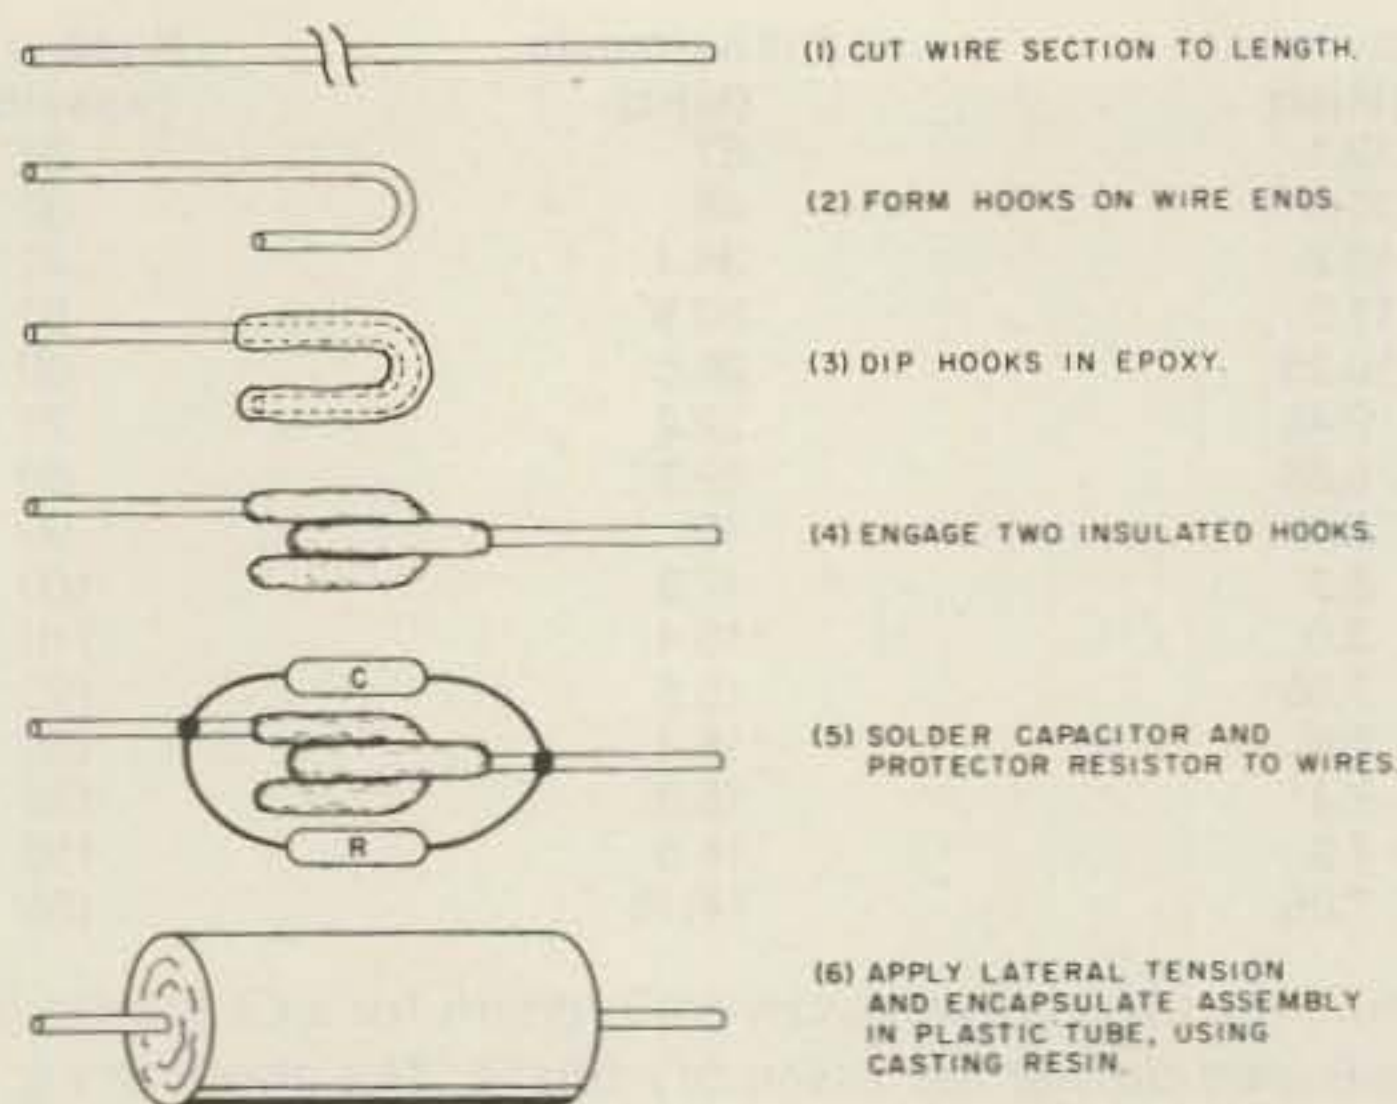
Steps for constructing one type of rugged weather-proof capacitor/resistor assembly.
